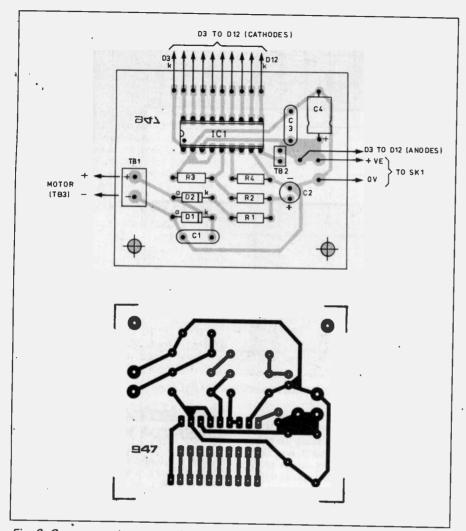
Component layout and full size copper foil track master for the Windicator printed circuit board.
